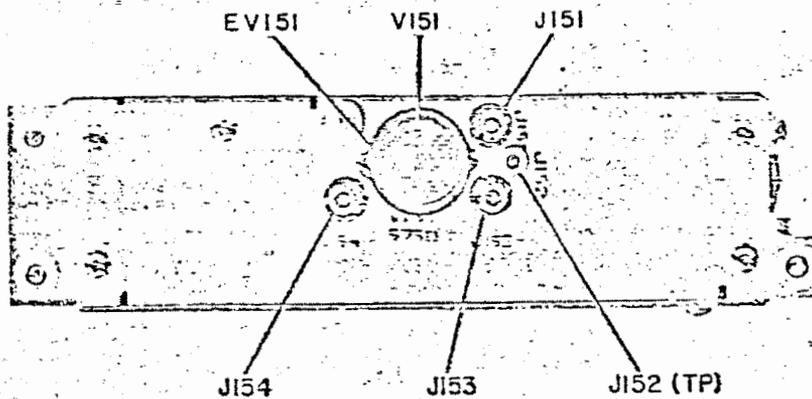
Preselector (Mixer Subassembly), Top View, Location of Parts
